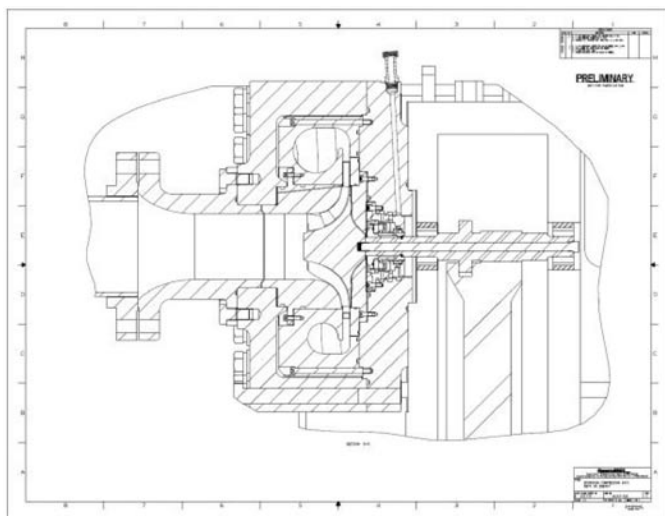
Mechanical Detailed Assembly of One Stage, Prototype Compressor
